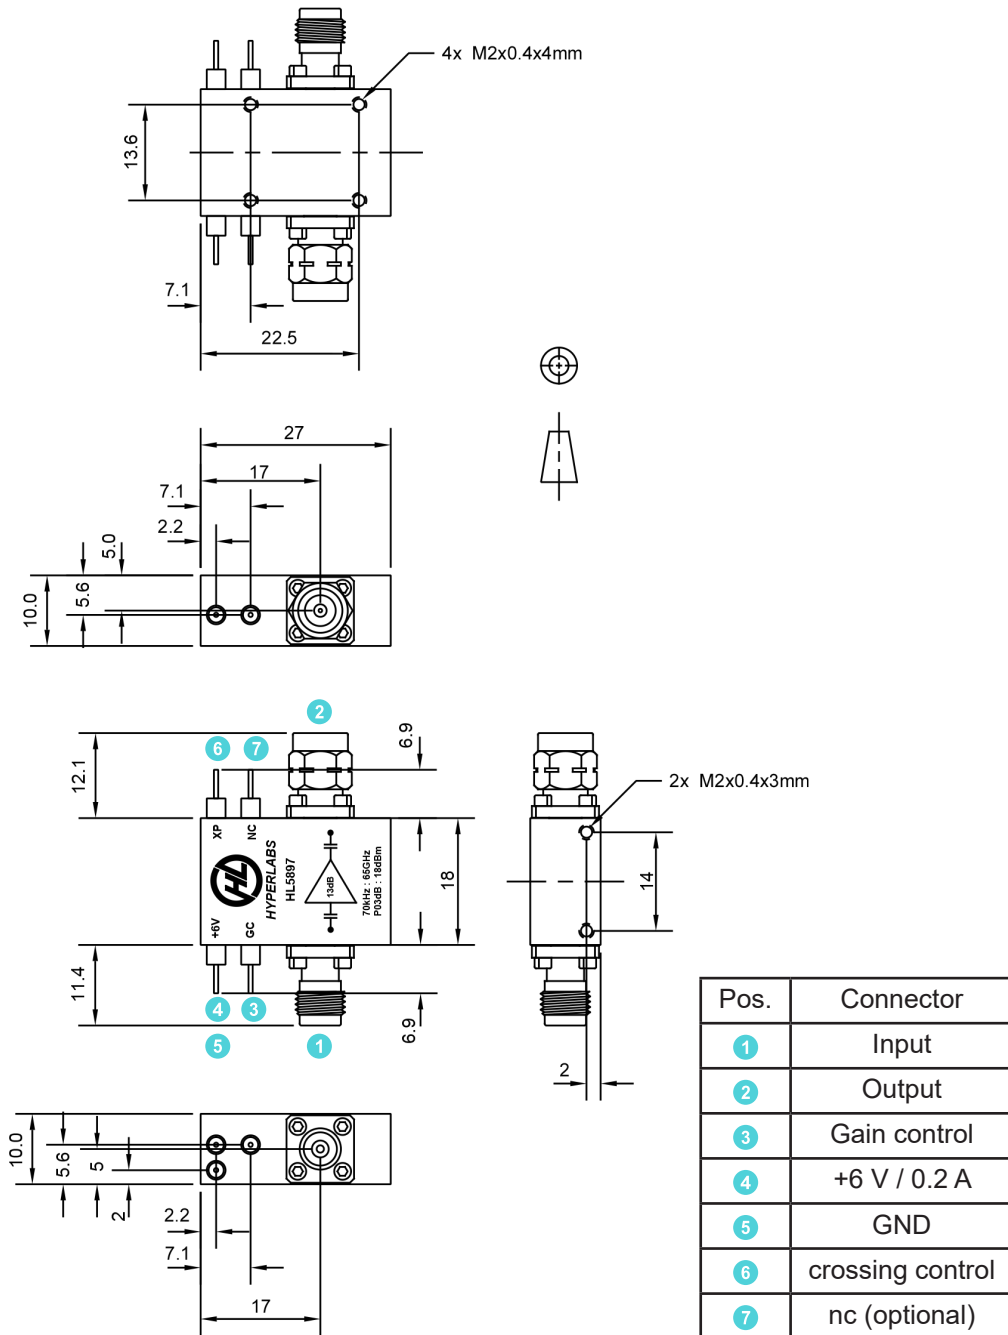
HL5897 mechanical drawing (opt. -18-JP), mm
